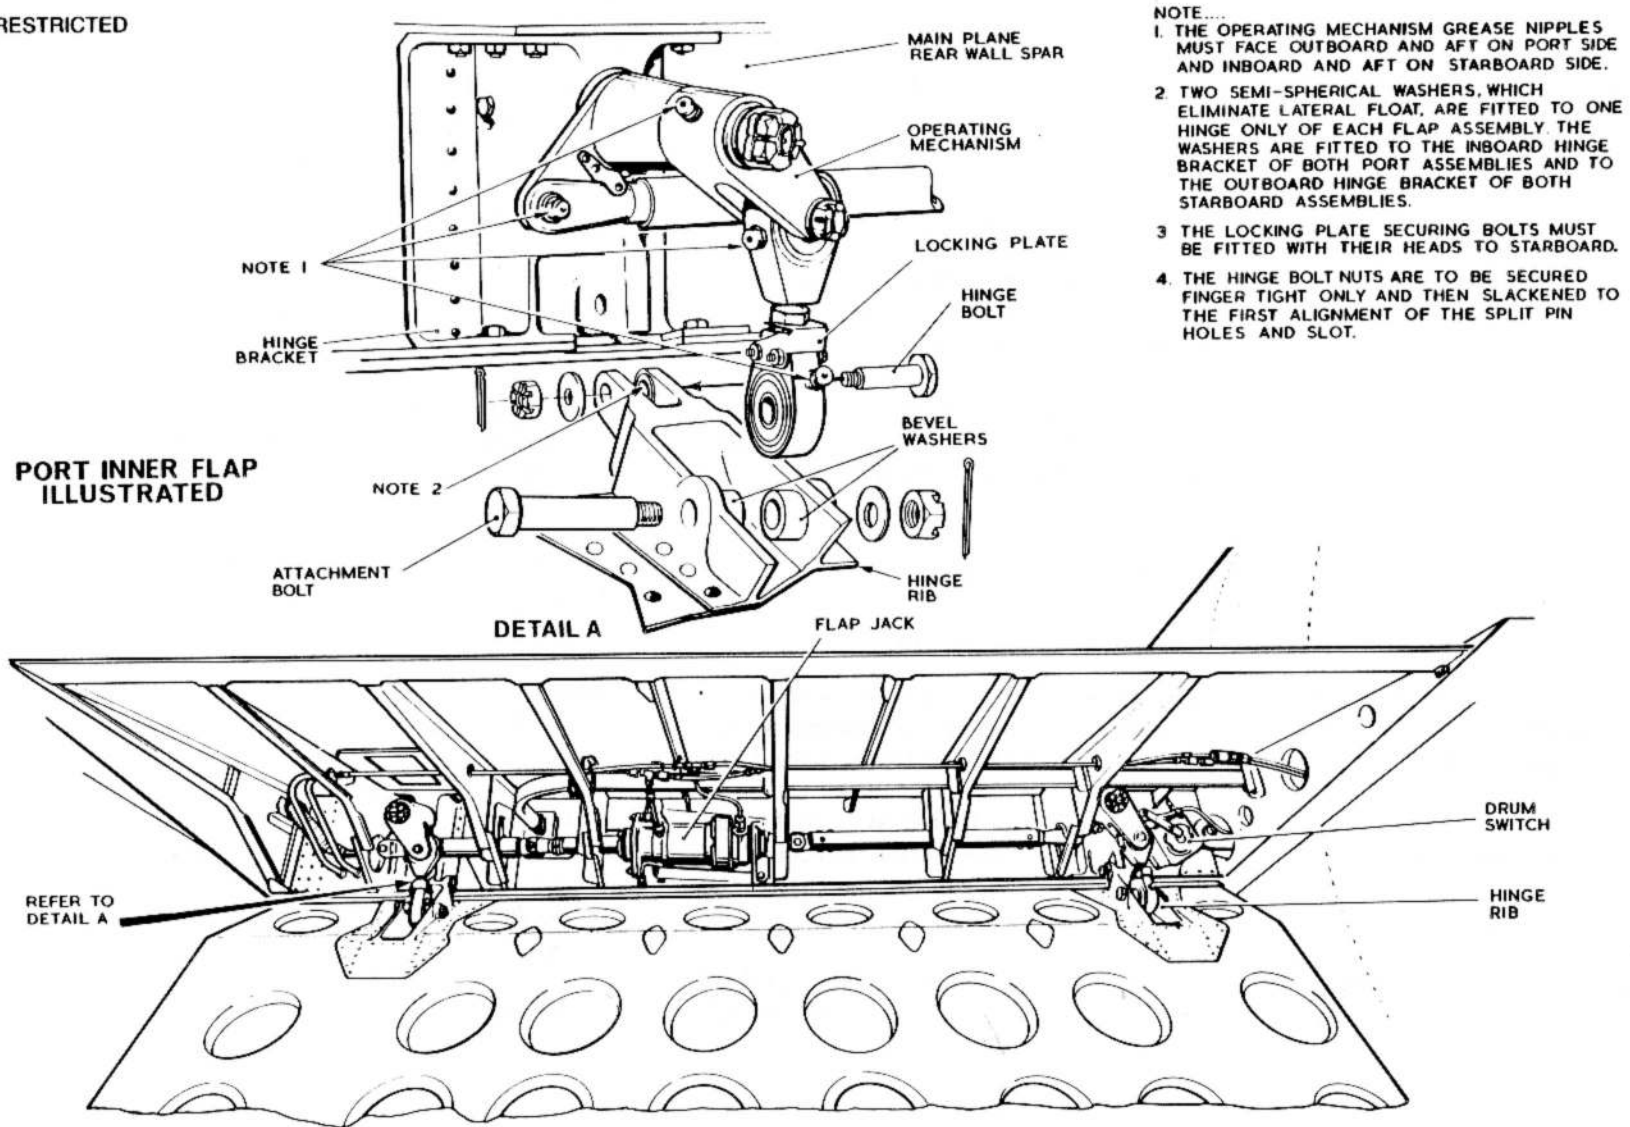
FLAP - REMOVAL AND ASSEMBLY
